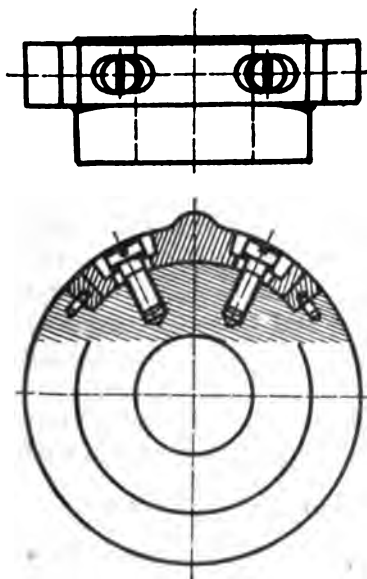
View of cam for actuating fuel valve, showing slotted holes.
